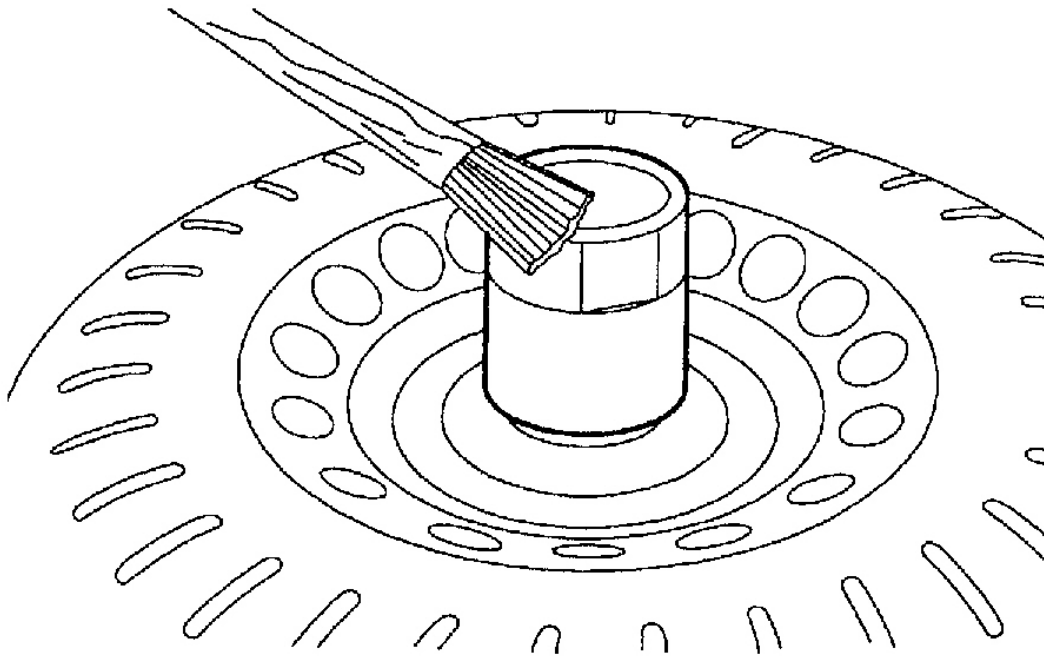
Removing Fluid Pump Gear Seal Ring Installer Tool
